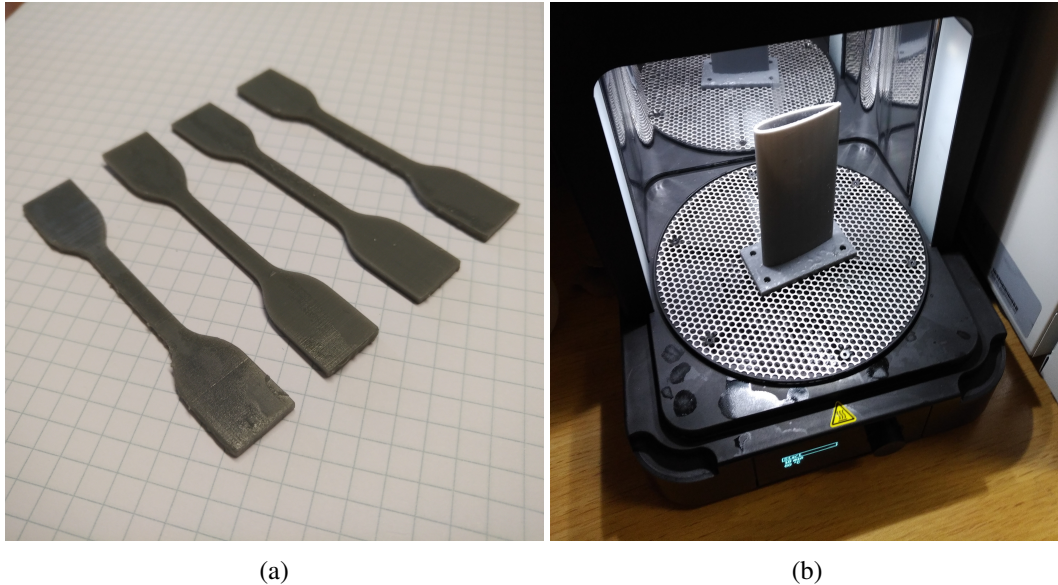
Additively manufactured ABS parts printed using the Formlabs Form 2 printer: (a) specimens printed for tensile test campaign to characterise material behaviour, and (b) final printed and post-cured airfoil beam specimen
